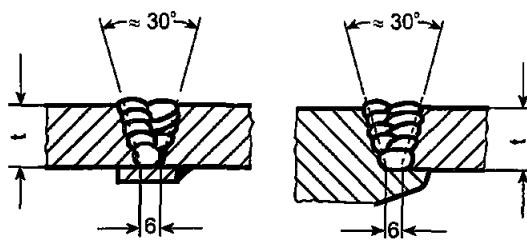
Single-side welds with permanent weld pool support (backings)
